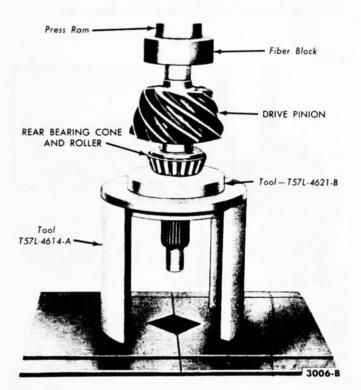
Drive Pinion Rear Bearing Cone and Roller Installation
